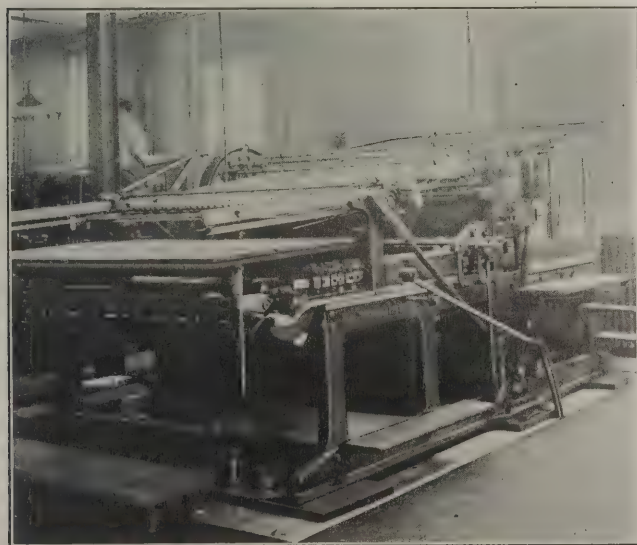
Drum Controller installed for Controlling Motor-driven Printing Press
